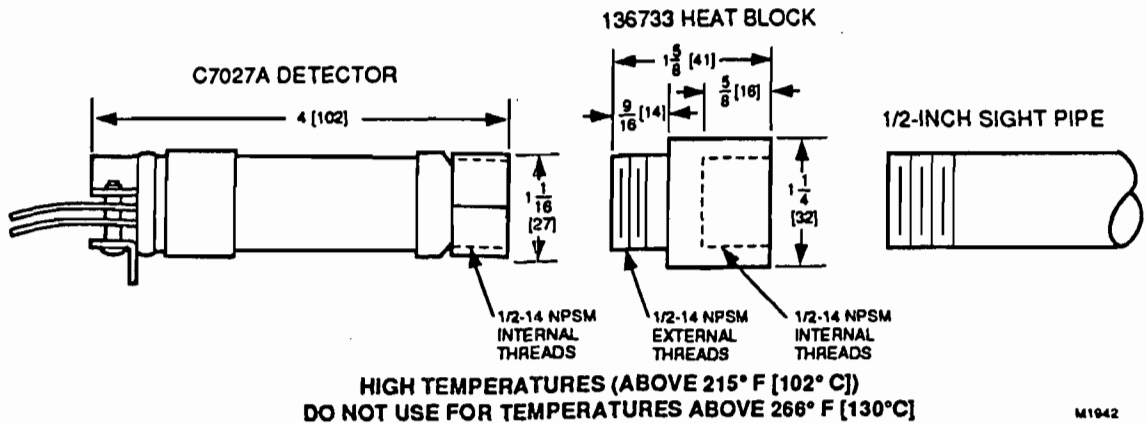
Mounting dimensions of 136733 heat block, in in. [mm in brackets].
